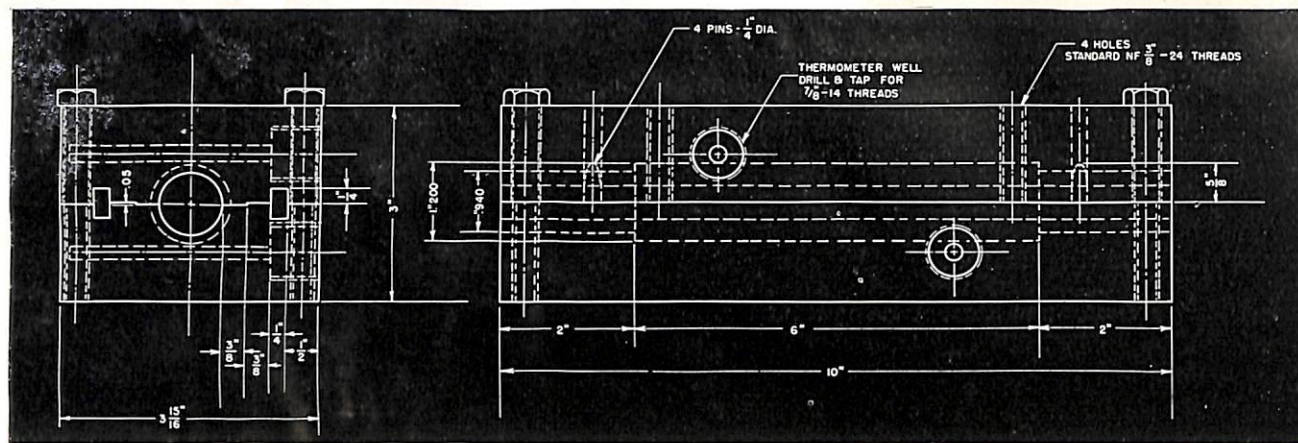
Details of the mold for splicing RG-35/U Cable.
